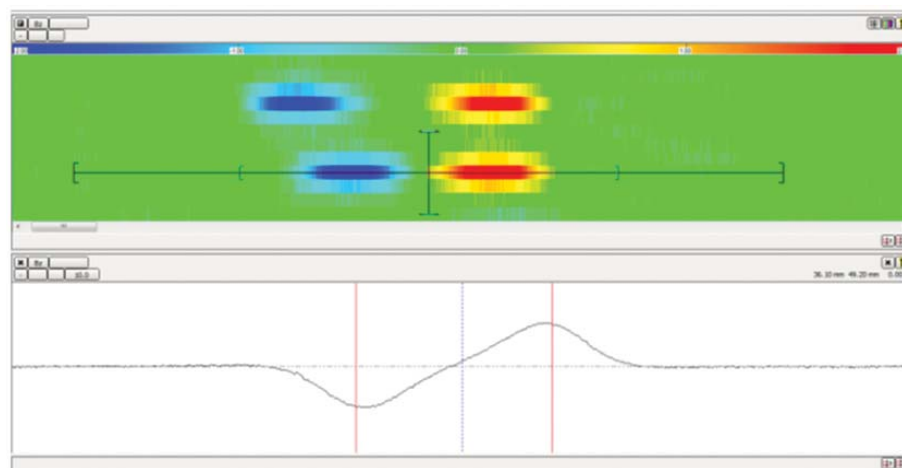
Defect is 15mm long and has been sized at 13.2mm according to the side view measurement
